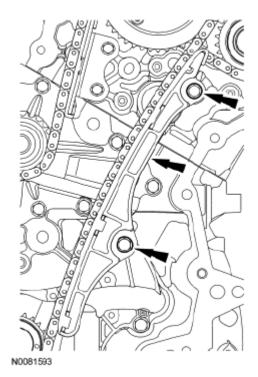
Locating Primary Timing Chain Tensioner Arm Courtesy of FORD MOTOR CO.
